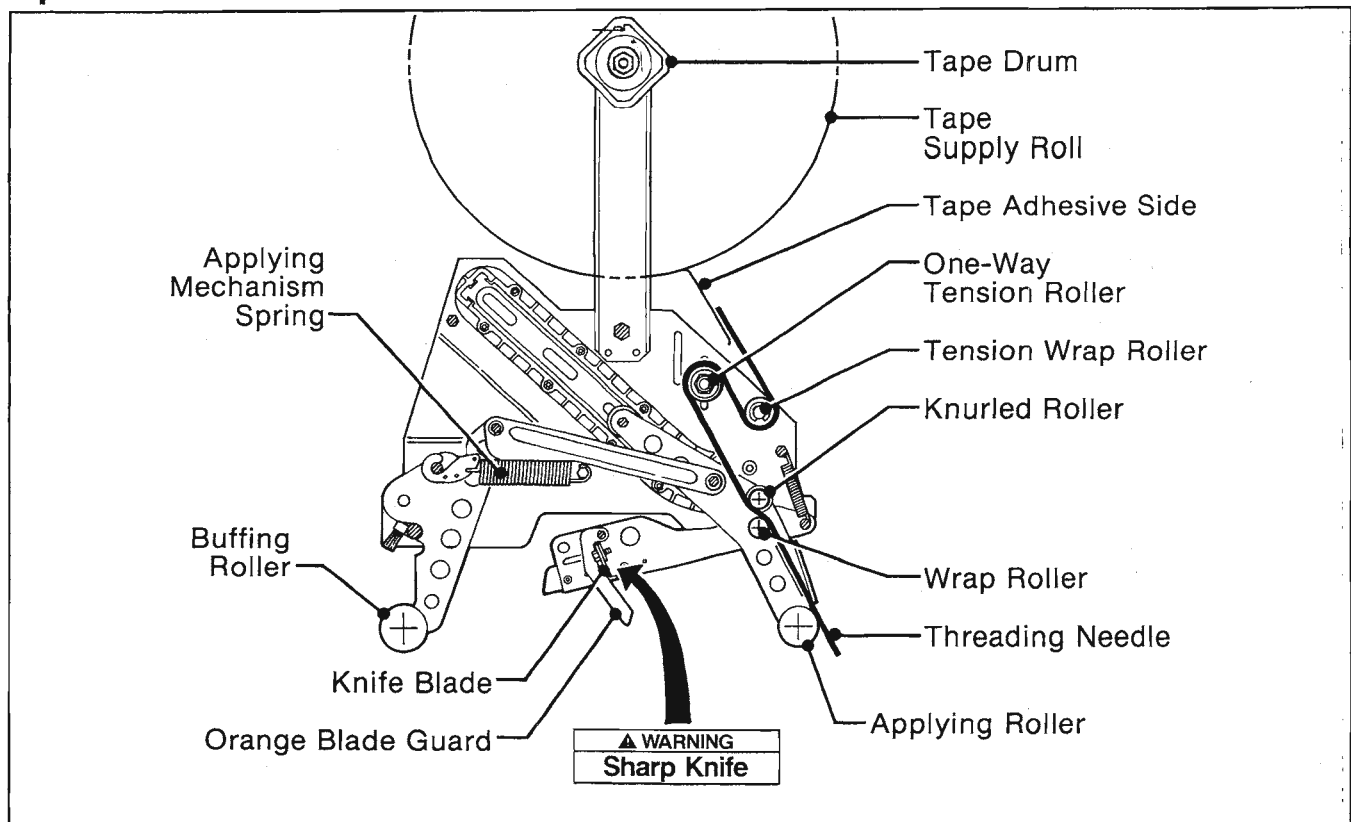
Taping Head Components/Threading Diagram, Upper Head (Left Side View)
